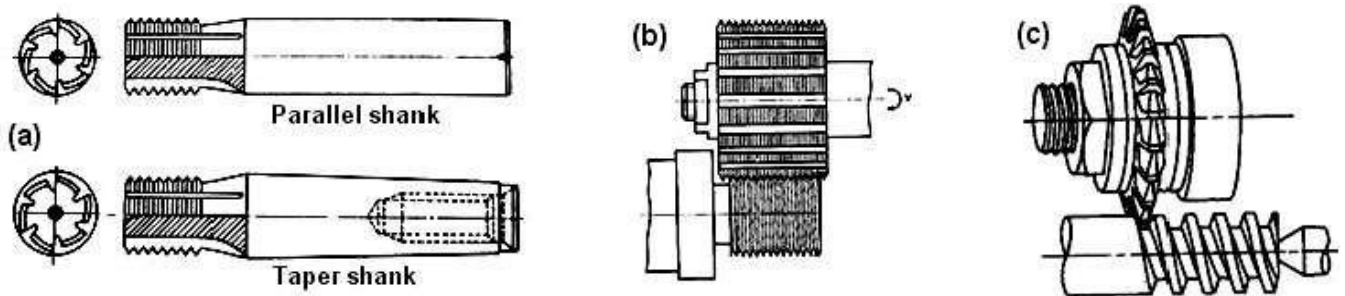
(a) Internal thread milling cutters (b) Short thread milling cutter (c) Long thread milling cutter
